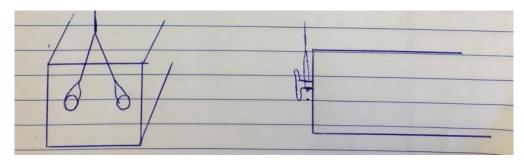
Lifting the machine top with cable connection and screw in connectors
